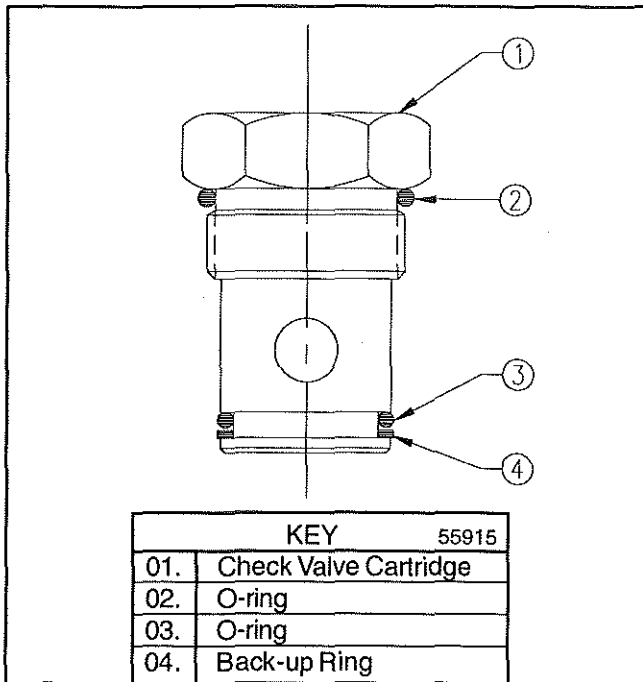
CHECK VALVE CARTRIDGE ASSEMBLY
